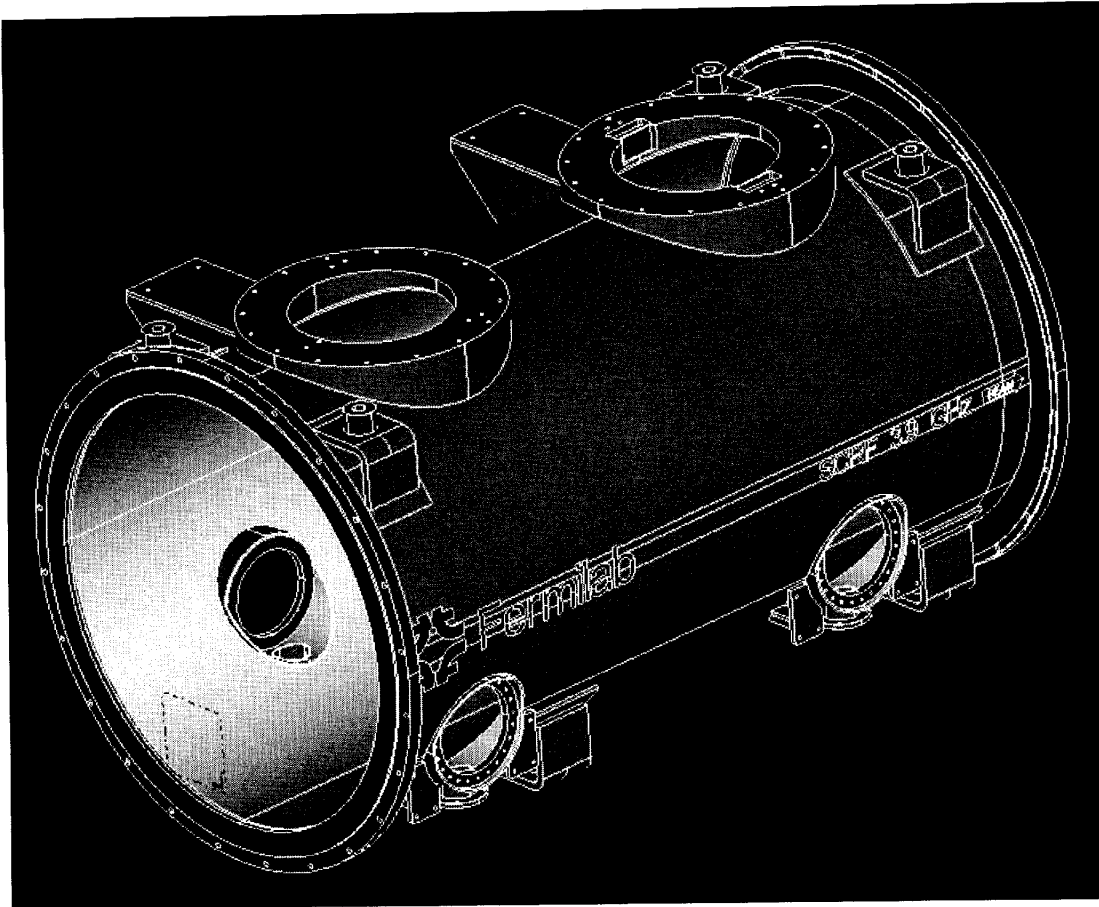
, An overall view of the vacuum vessel weldment of 3.9 MHz,
